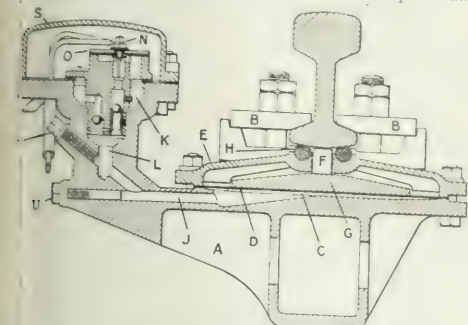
Cross-Section of Treadle Bolted to Rail.
